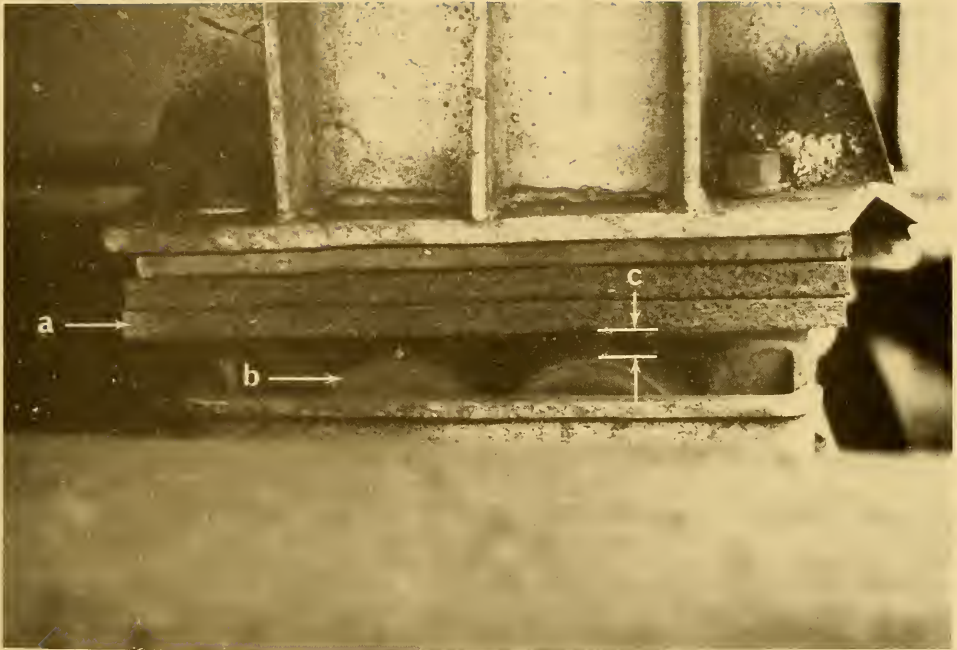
Components of a side bearing: (A) the side bearing plate attached to the car body bolster, (B) the roller attached to the truck, and (C) the side bearing clearance in-between.
